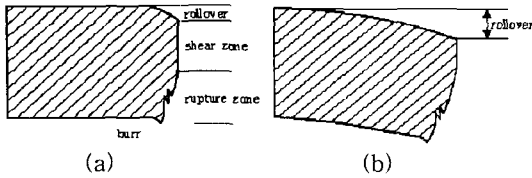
Schematic draw of cut edge of (a) blanked part (b) hydro-pierced part
